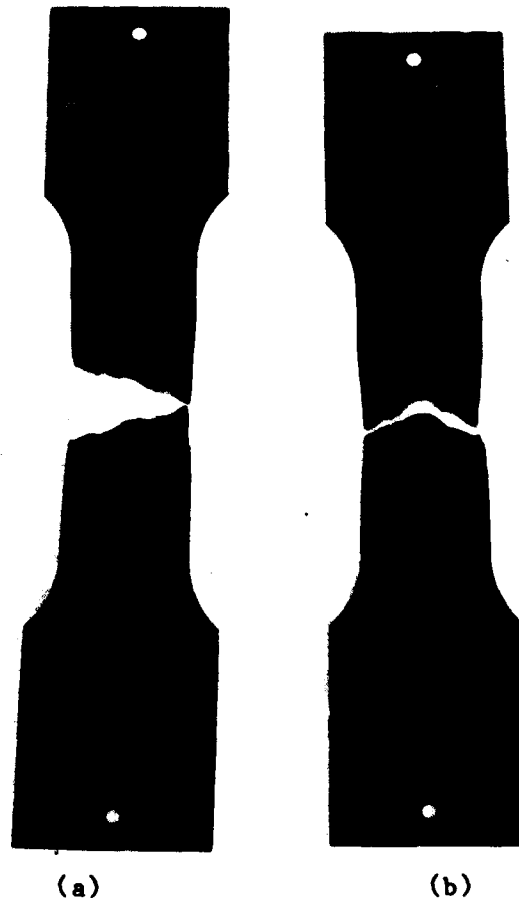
Upper Parts are Front Side and Lower Parts are Reverse Side of (a) a Noncosmetic Weld and (b) a Cosmetic Weld.
